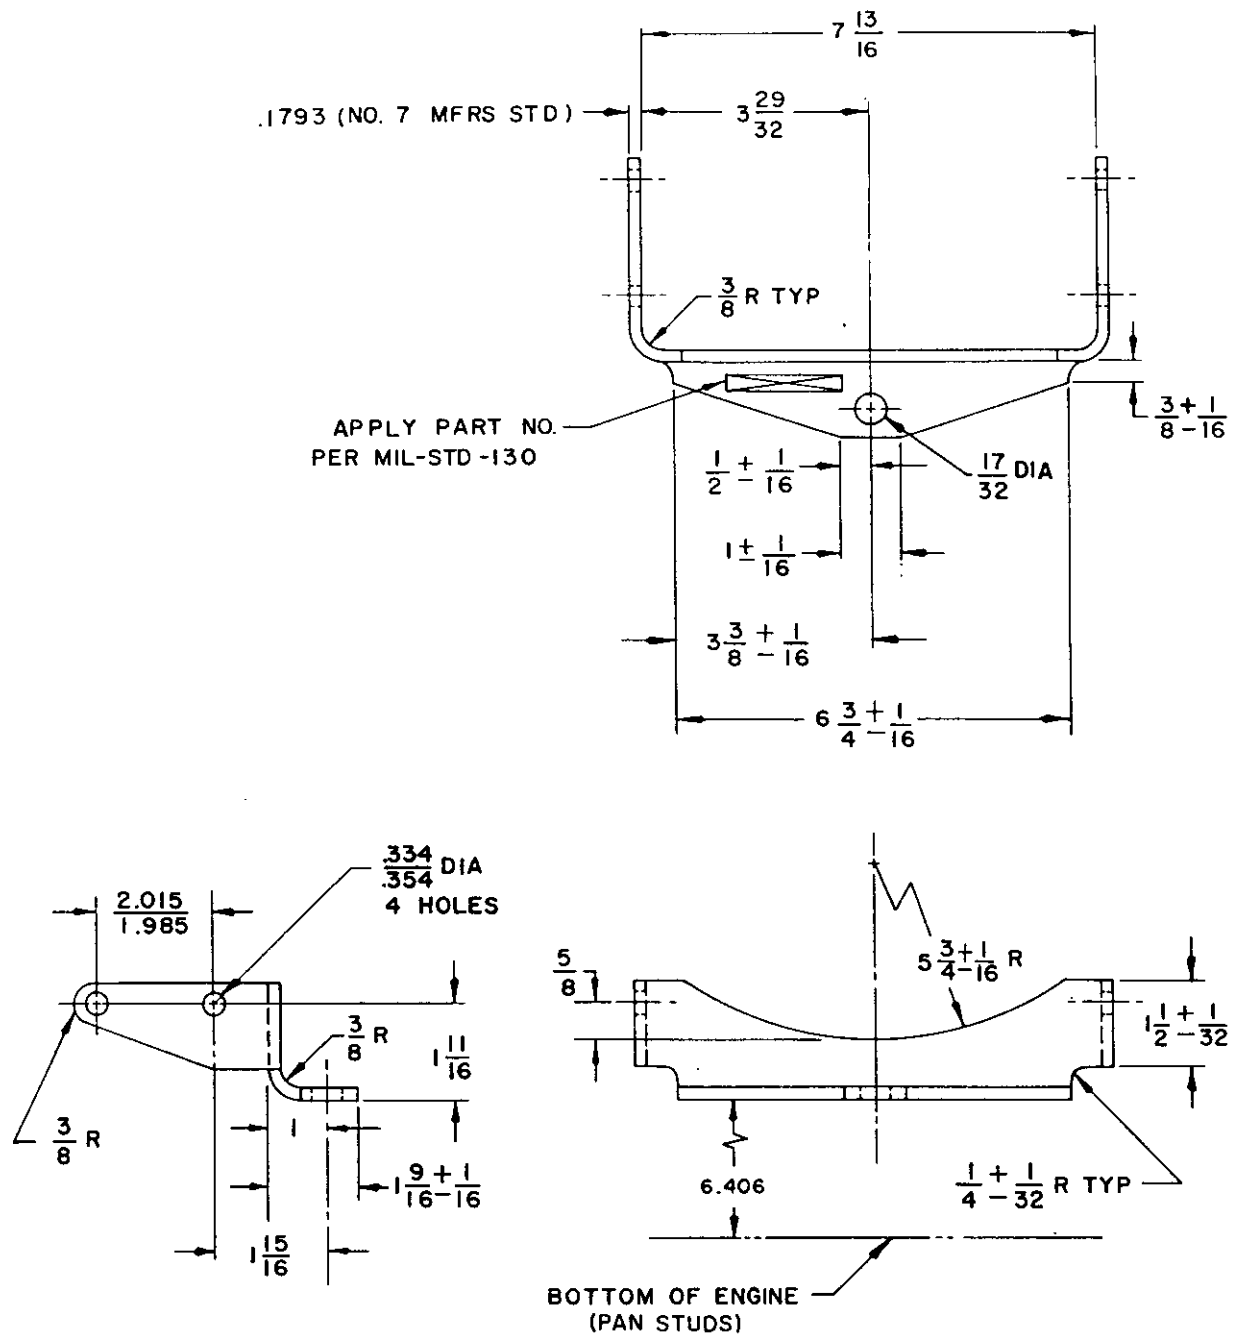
ENGINE FRONT MOUNTING BRACKET
